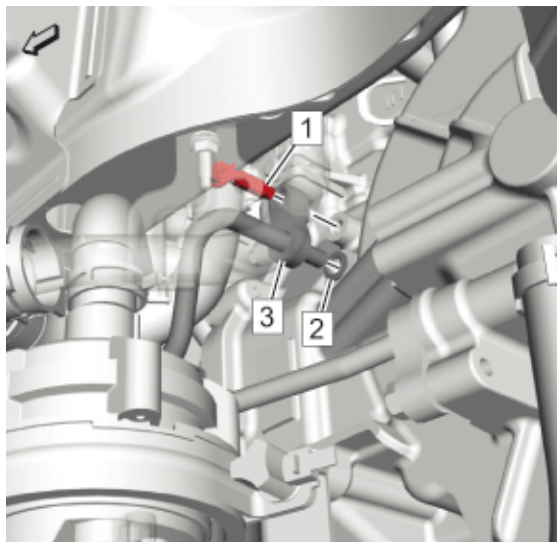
Transmission Fluid Cooler Inlet Pipe, Bolt And Sealing Washer
